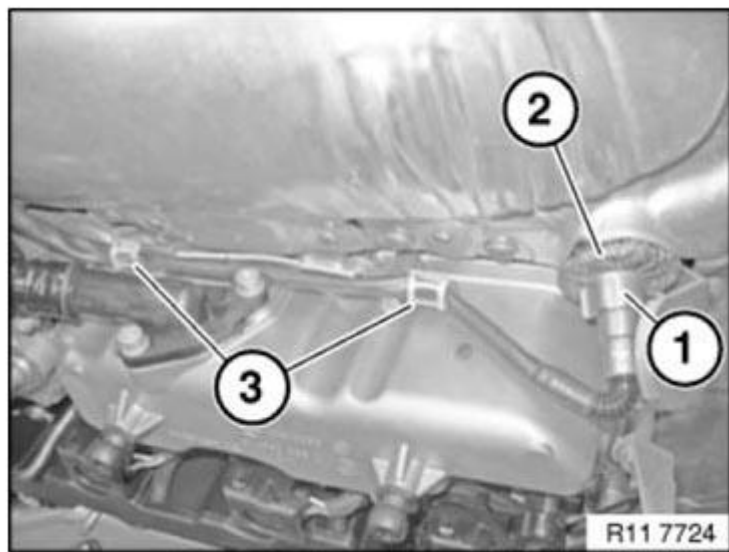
Identifying Heat Shield Wire Ring And Retaining Clips
